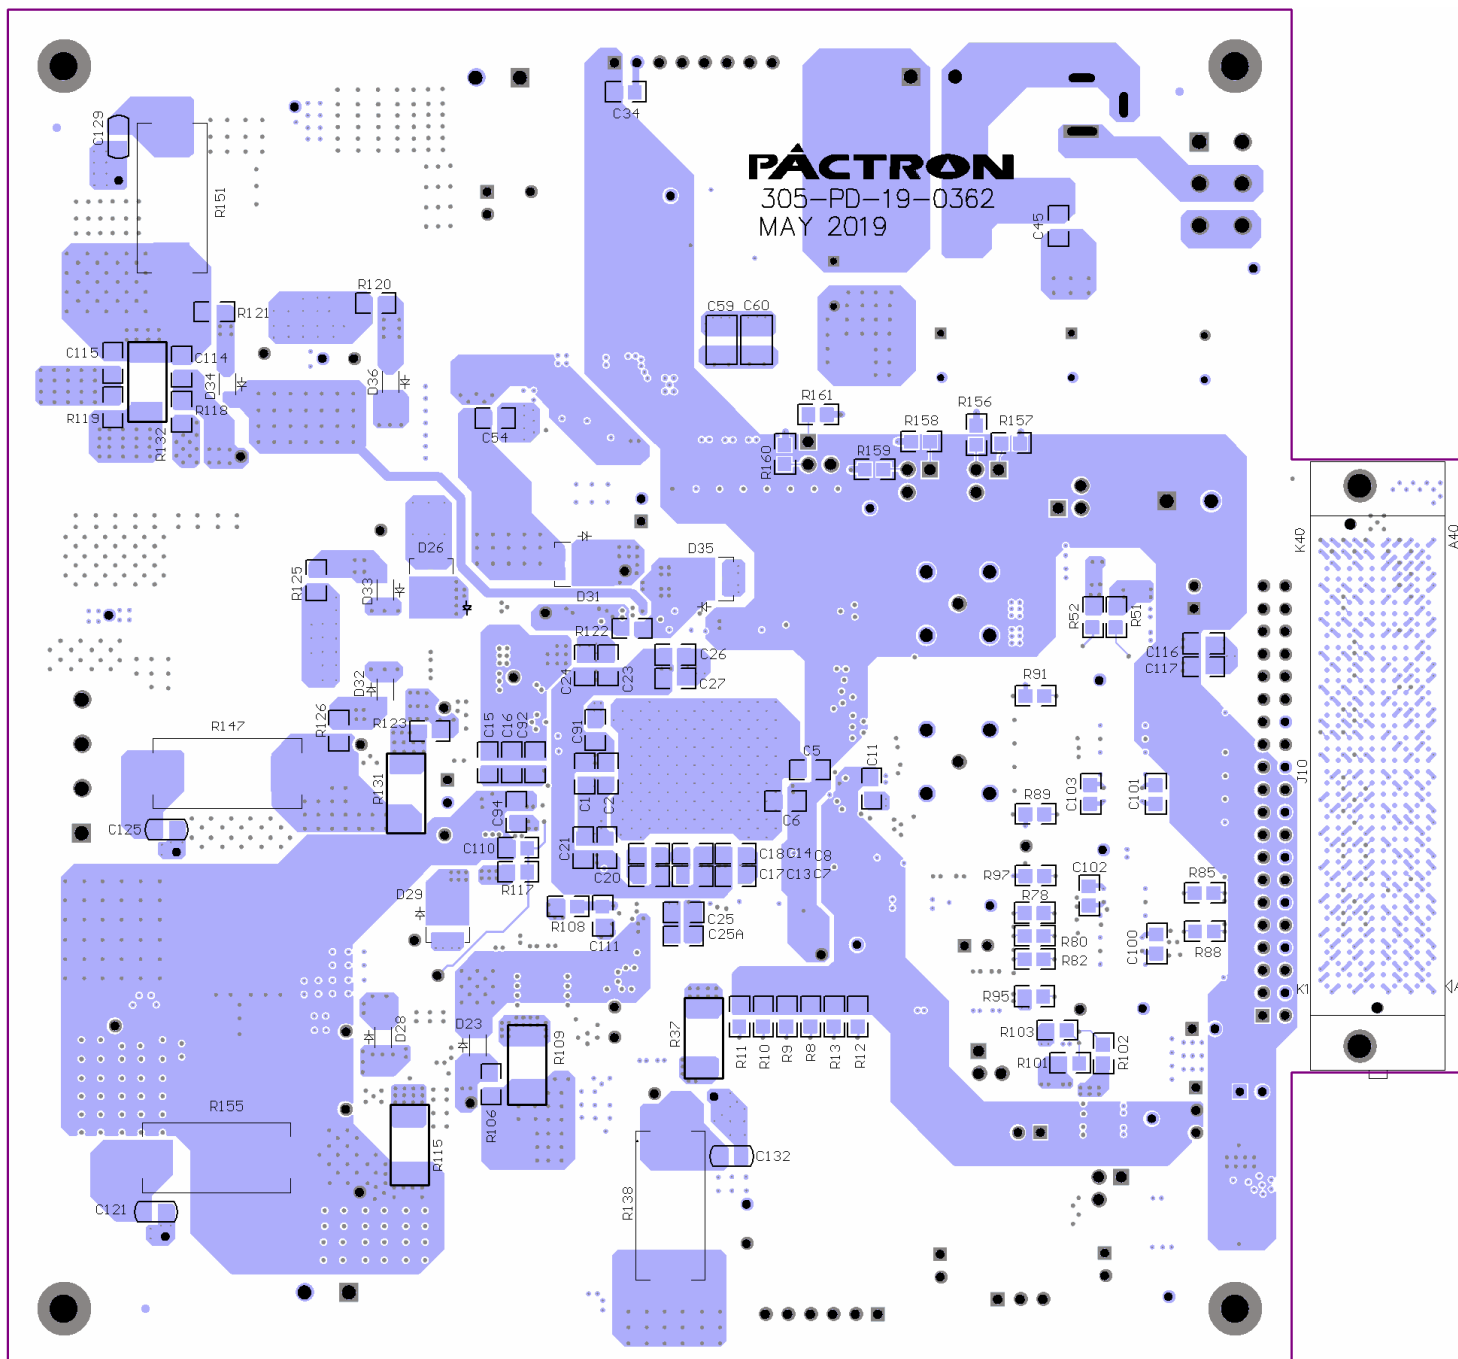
PCB Bottom copper layer and component IDs (bottom view)
